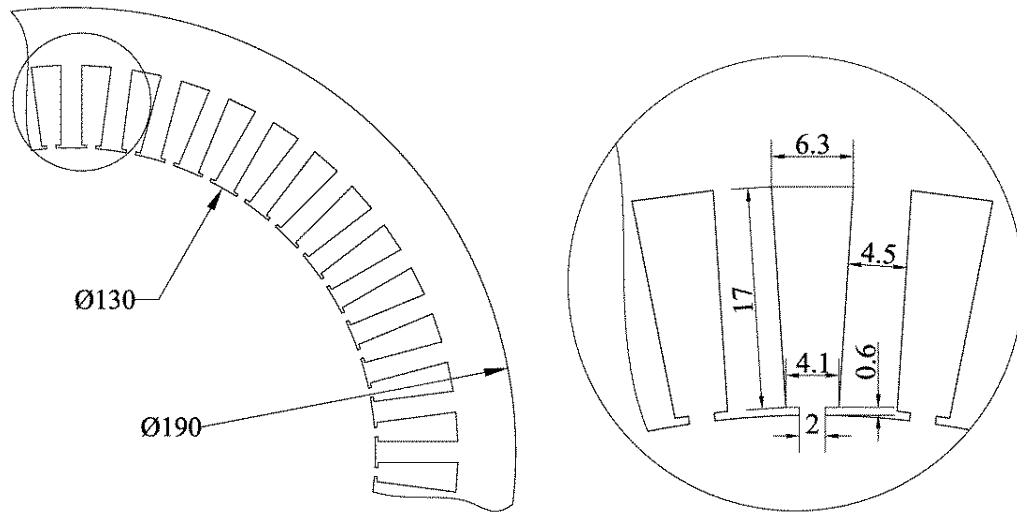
Stator iron design, iron sheet NO 20 (dimensions in mm)
